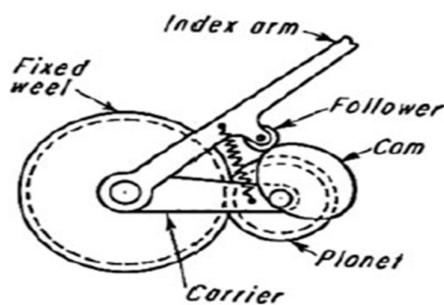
Planetary Gear-Cam mechanism with fixed sun gear.
